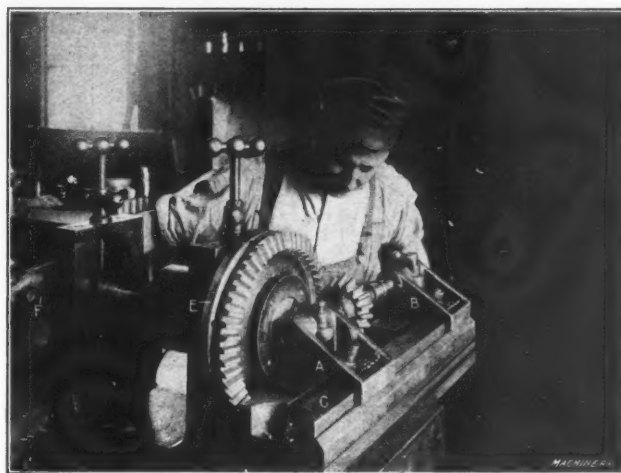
Running Test for Noise on Bevel Ring Gears and Pinion, accomplished by Hand
